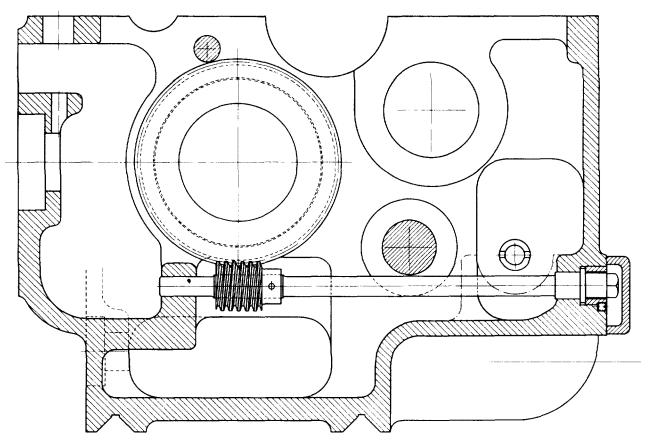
Diagram showing means for adjusting Spindle Bearings
